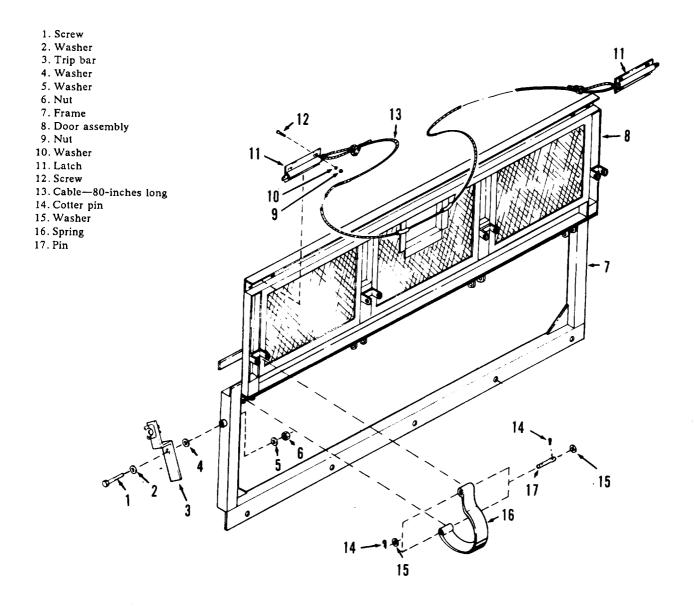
Hose Reel Cabinet Door Assembly (M970 and M970A1).
